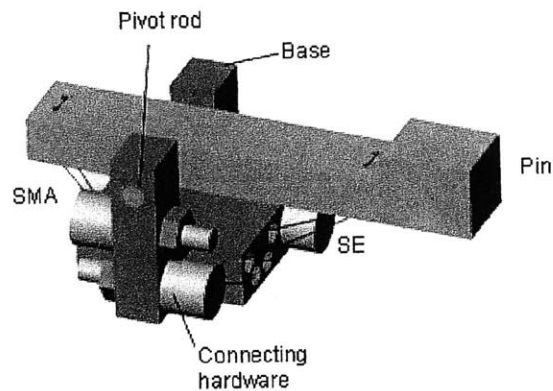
Implementation of the actuator mechanism shown in Figure 6-1. In this design, the overall height of the tactor unit is 15 mm, length is 40 mm, and width is 18 mm.
